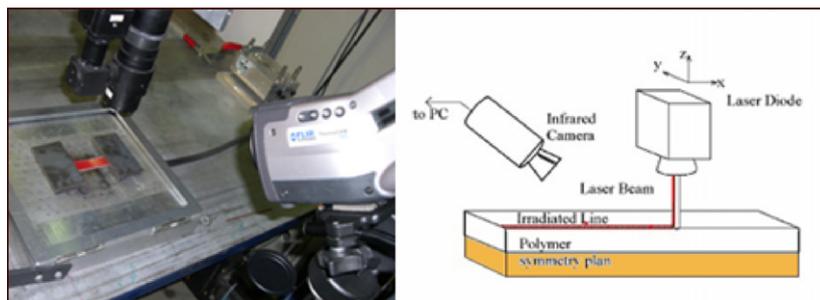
Equipment for IR image recording during laser welding.
